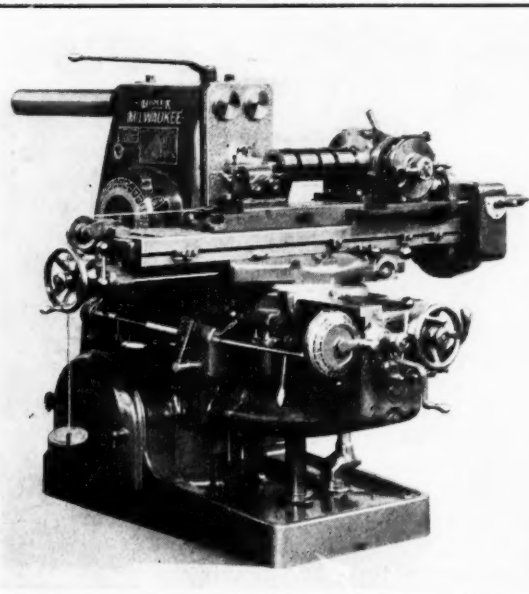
Milling Barrel Cams by the Use of the Kearney & Trecker Cam-milling Attachment
